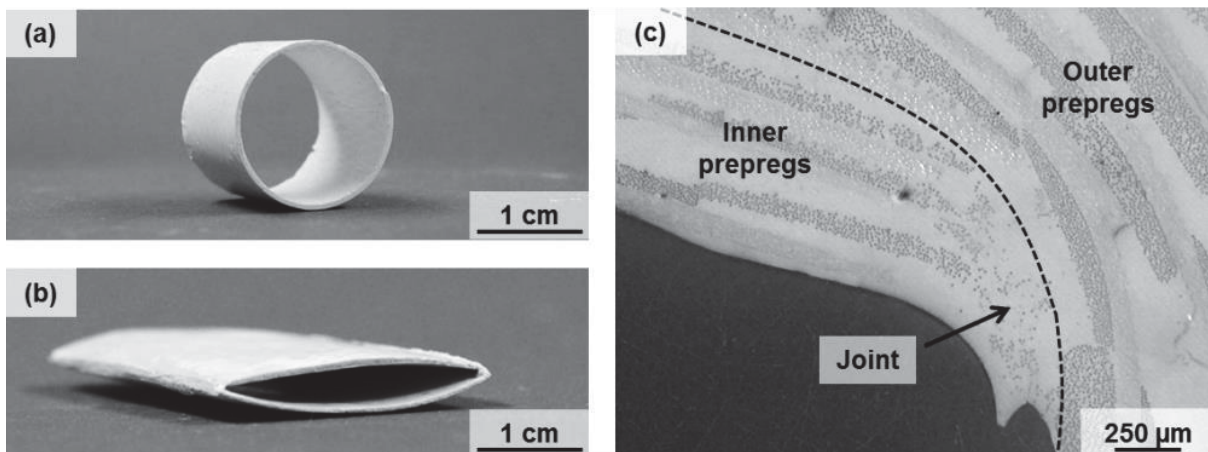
Preliminary tests of shaping and joining: (a) cylinder produced by a tape-laying technique according to [93]; (b) CMC part produced by the compression molding of two flat consolidated laminates, with subsequent joining by fusion bonding; (c) cross section of a joint (optical microscopy).
